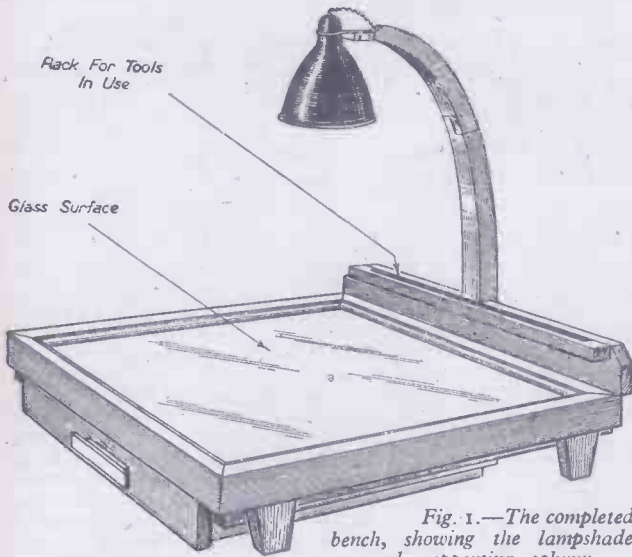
The completed bench, showing the lampshade and supporting column.
